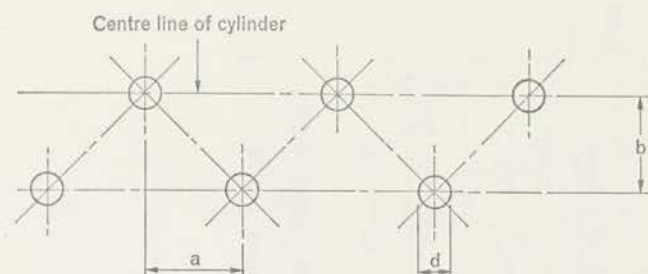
REGULAR SAW-TOOTH PATTERN OF HOLES
